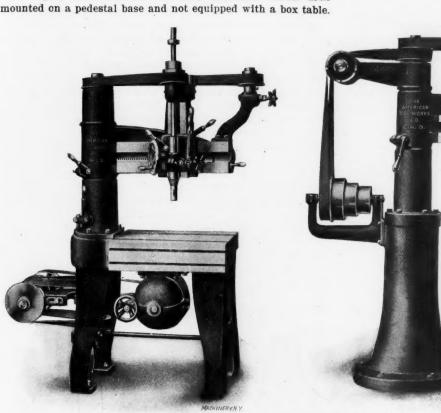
American Tool Works Co.'s 2-foot Radial Drill with Motor Drive
